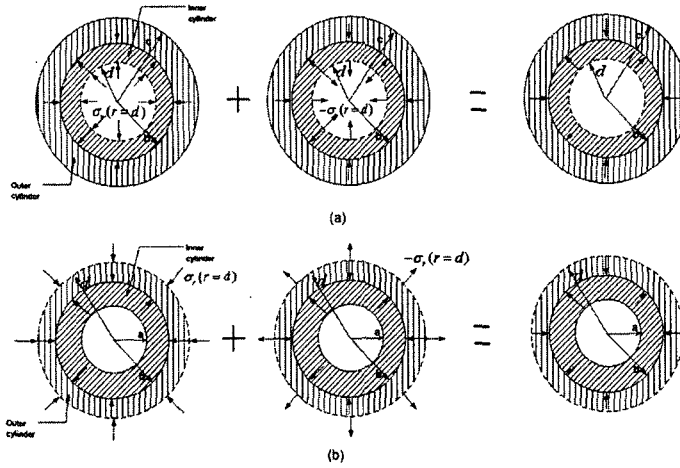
The superposition for obtaining the post-machining autofrettaged compound cylinder: (a) inner machining, (b) outer machining⁽⁶⁾
